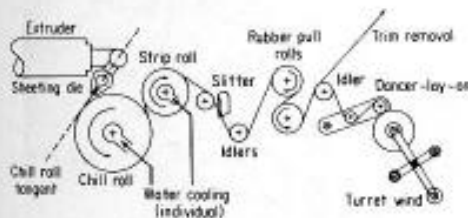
Chill roll extrusion setup. (Courtesy E. I. du Pont de Nemours & Co., Inc.)
